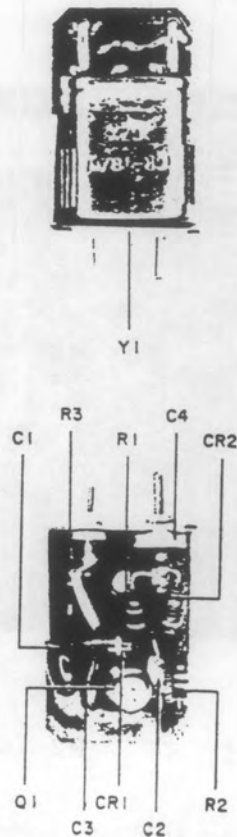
Part 1769-3 Beat Frequency Oscillator, Component Locations
